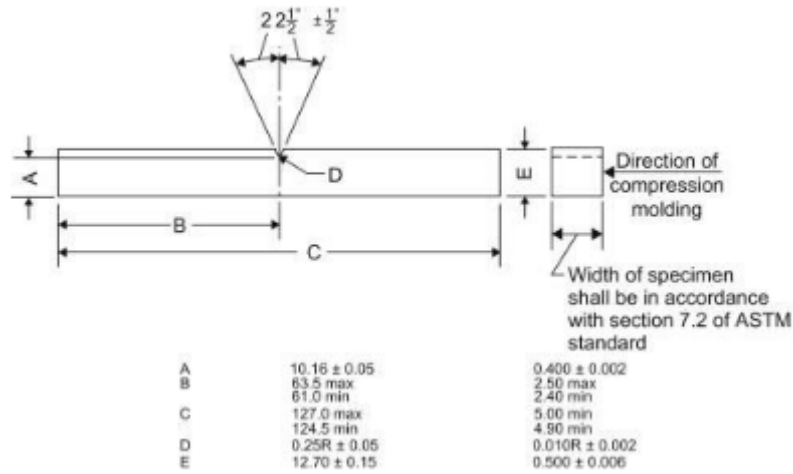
Specimen ASTM D6110-18 dimension [34]
